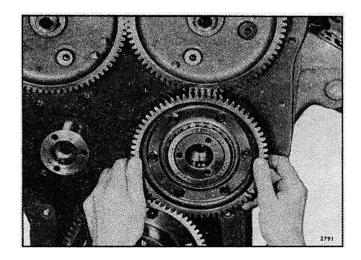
Installing Idler Gear, Hub and Bearing Assembly
